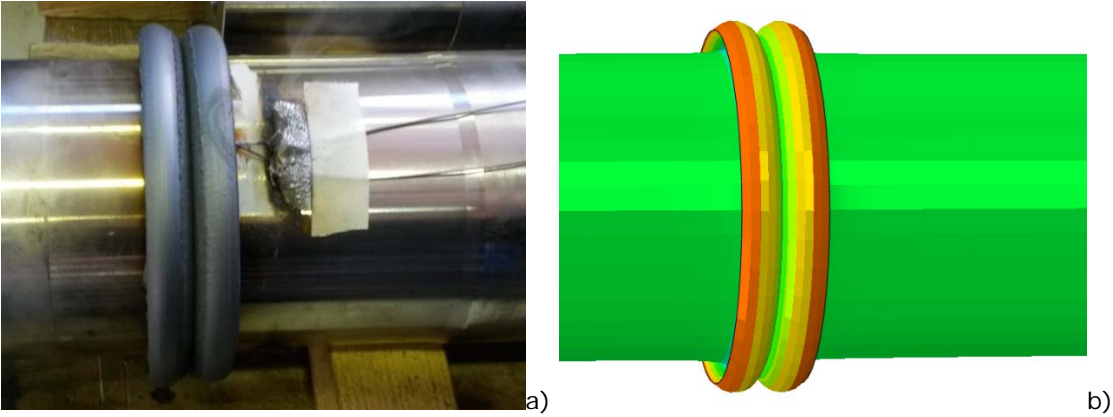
The resulting flash formation during the direct-drive friction welding obtained a) experimentally, b) numerically.
